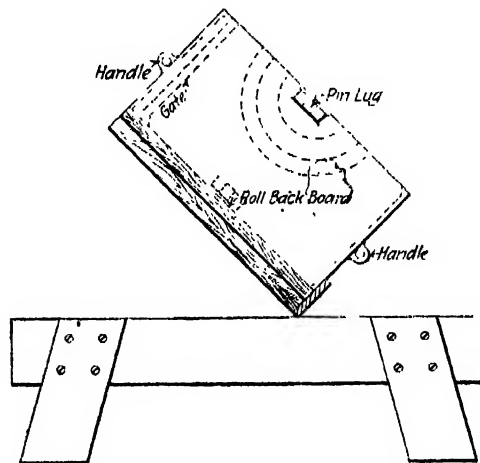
Rolling Rammed Cope on Roll-Back Board Preparatory to Drawing Pattern, or to Closing the Mold after the Pattern is Drawn
